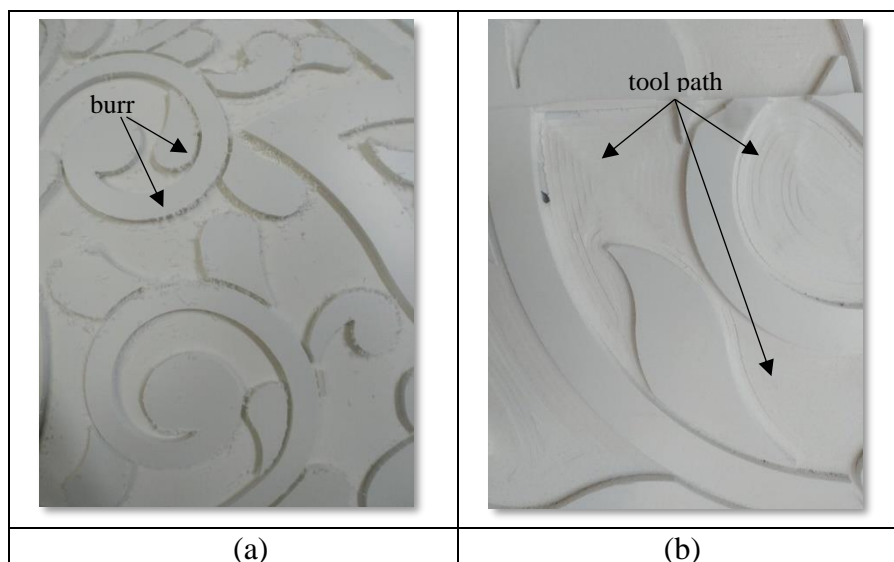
(a) Burr at the Edges of the Machined Pattern, (b) Trace of Cutting Tool Path
